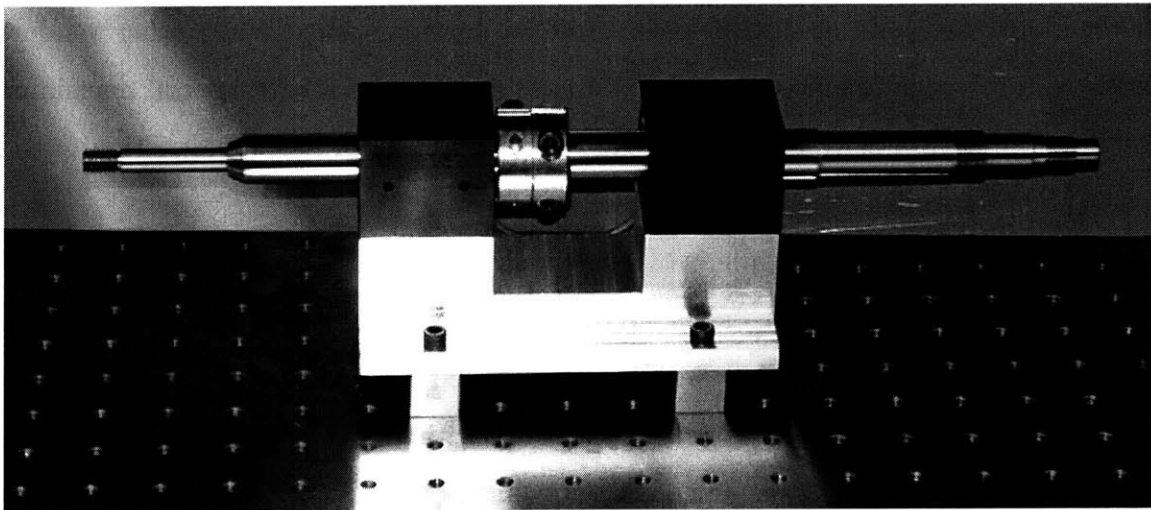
The precision ground stainless steel shaft rides in two air bushings. Shoulders and threads are machined into the shaft for attaching the magnetic rotors and sensor mirror mounts.
